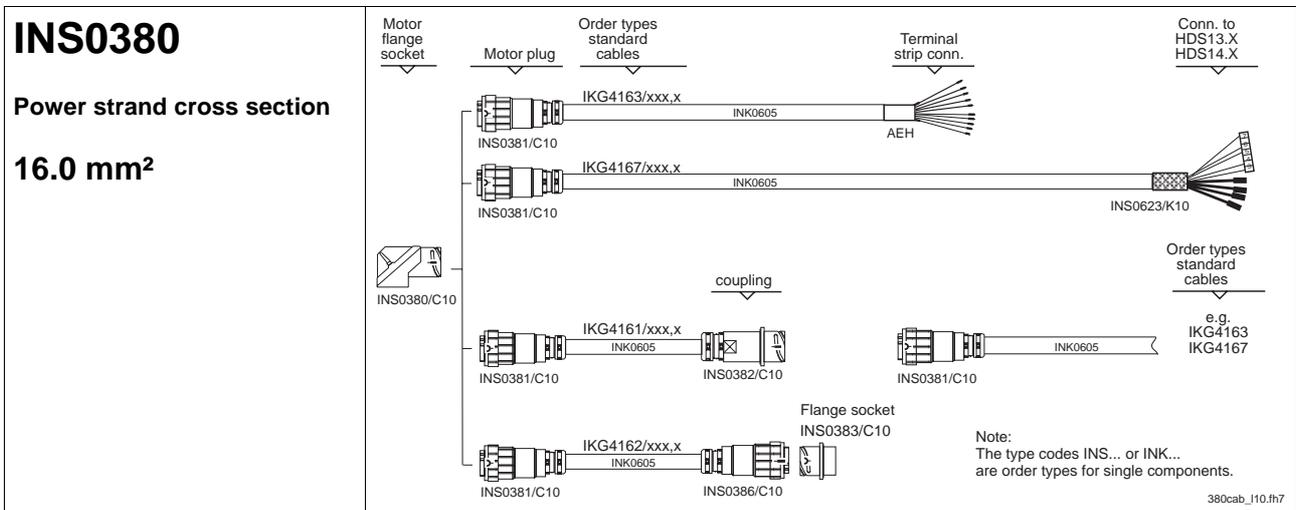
Motor power cable 16.0 mm<sup>2</sup> of flange socket INS0380
